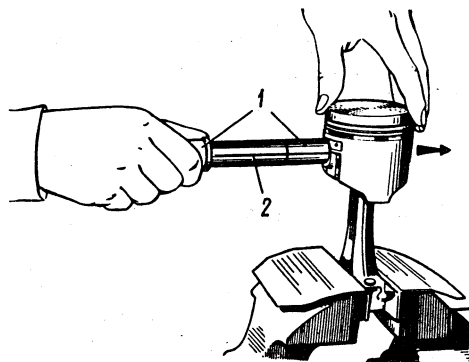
Pressing the Piston Pin into Connecting Rod Small End:
